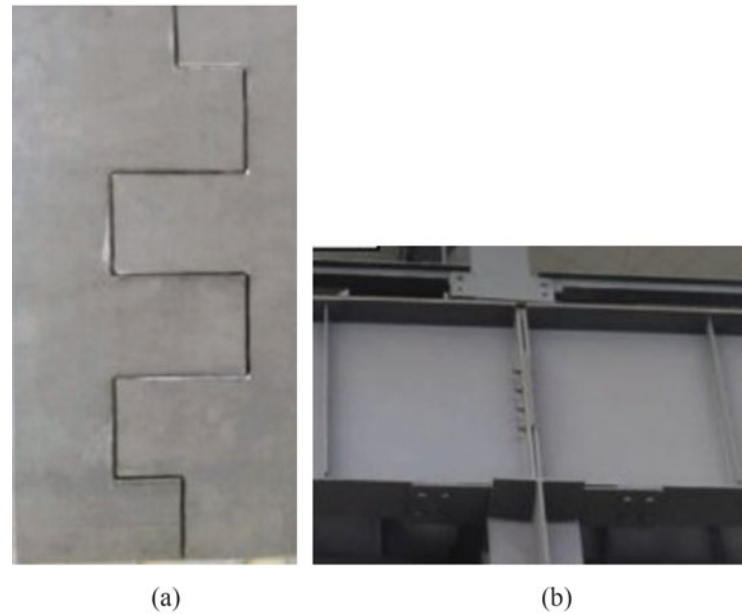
Typical tasks of path tracking operation. (a) A workpiece to be welded. (b) Rectangular fillet welds on steel beam.
